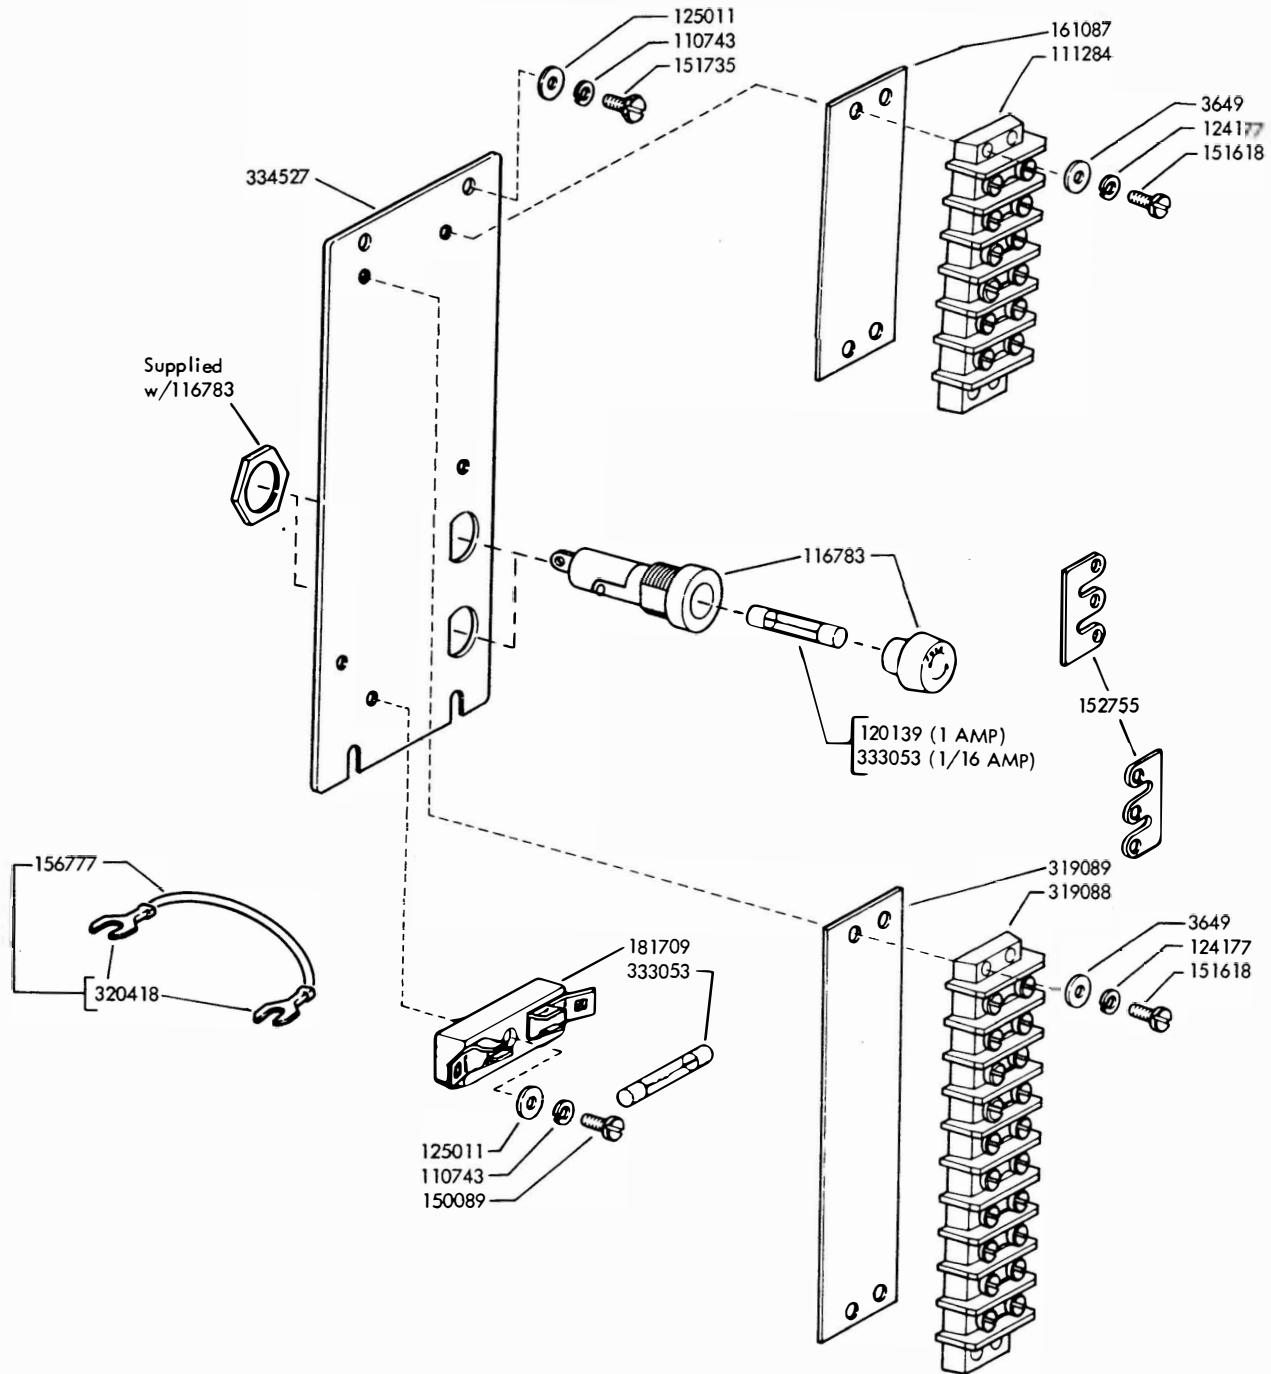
333610 PLATE ASSEMBLY (PART OF 333605 SEE FIGURES 8 & 9)
